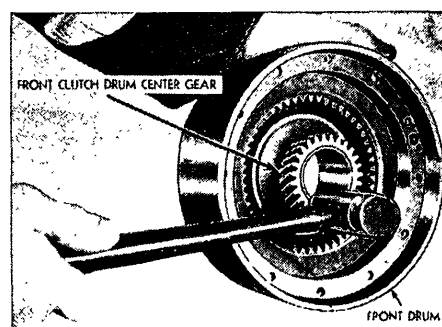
Separate drums by tapping front face of center gear, using care not to dislodge clutch release springs
